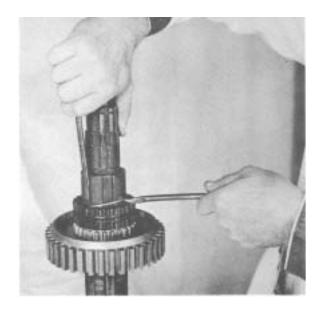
Remove 2nd & 3rd shift hub sleeve retainer ring.
